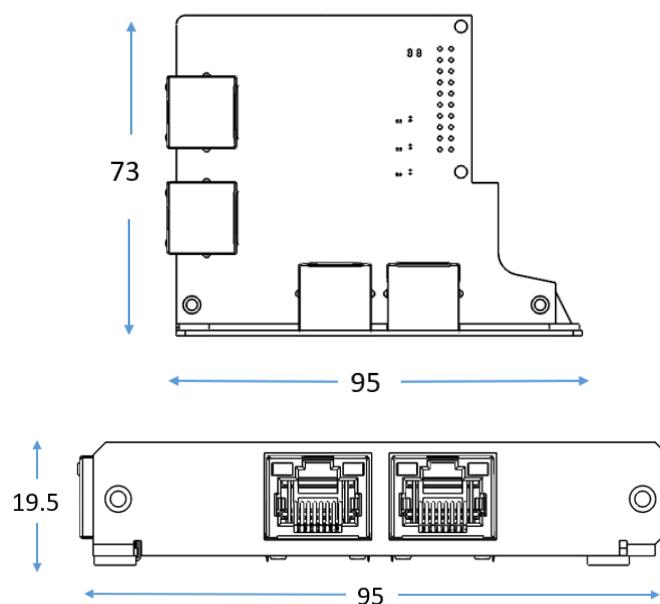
Ethernet Adapter Card Installation Dimensions
